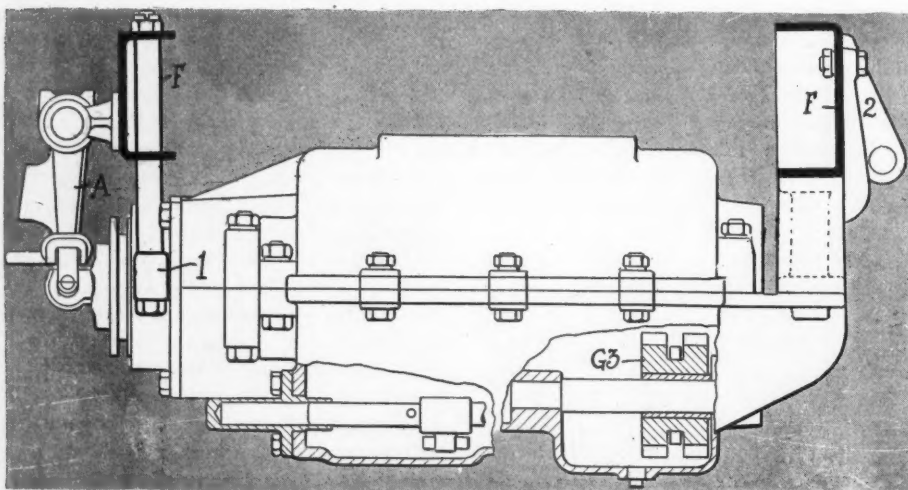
THREE-POINT SUPPORT OF ALCO GEARBOX
